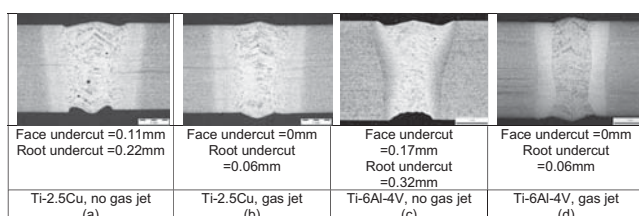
Weld profiles of Ti-6Al-4V and Ti-2.5Cu butt welds produced—for optimized directed gas jet conditions and no directed gas jet.
